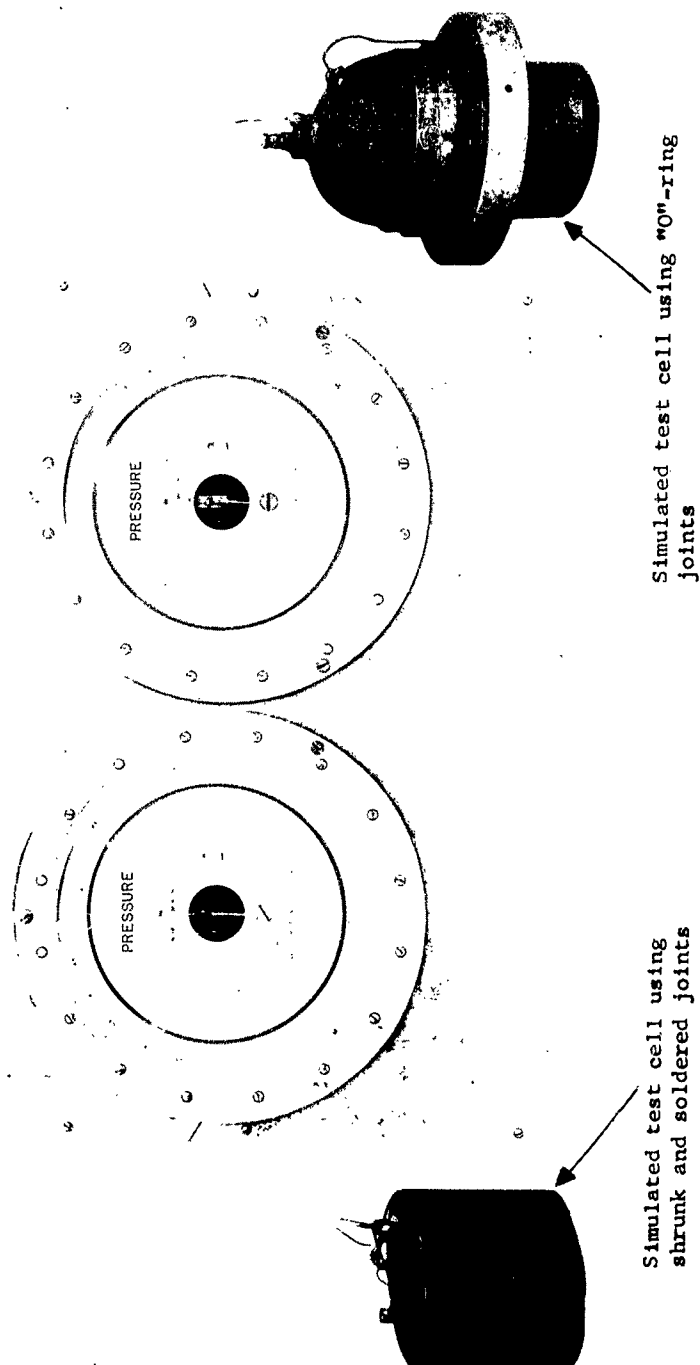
Test Cell System Leakage Determination Tests Using Various Joint Constructions ("O"-ring, and Shrunk and Soldered Joints)
